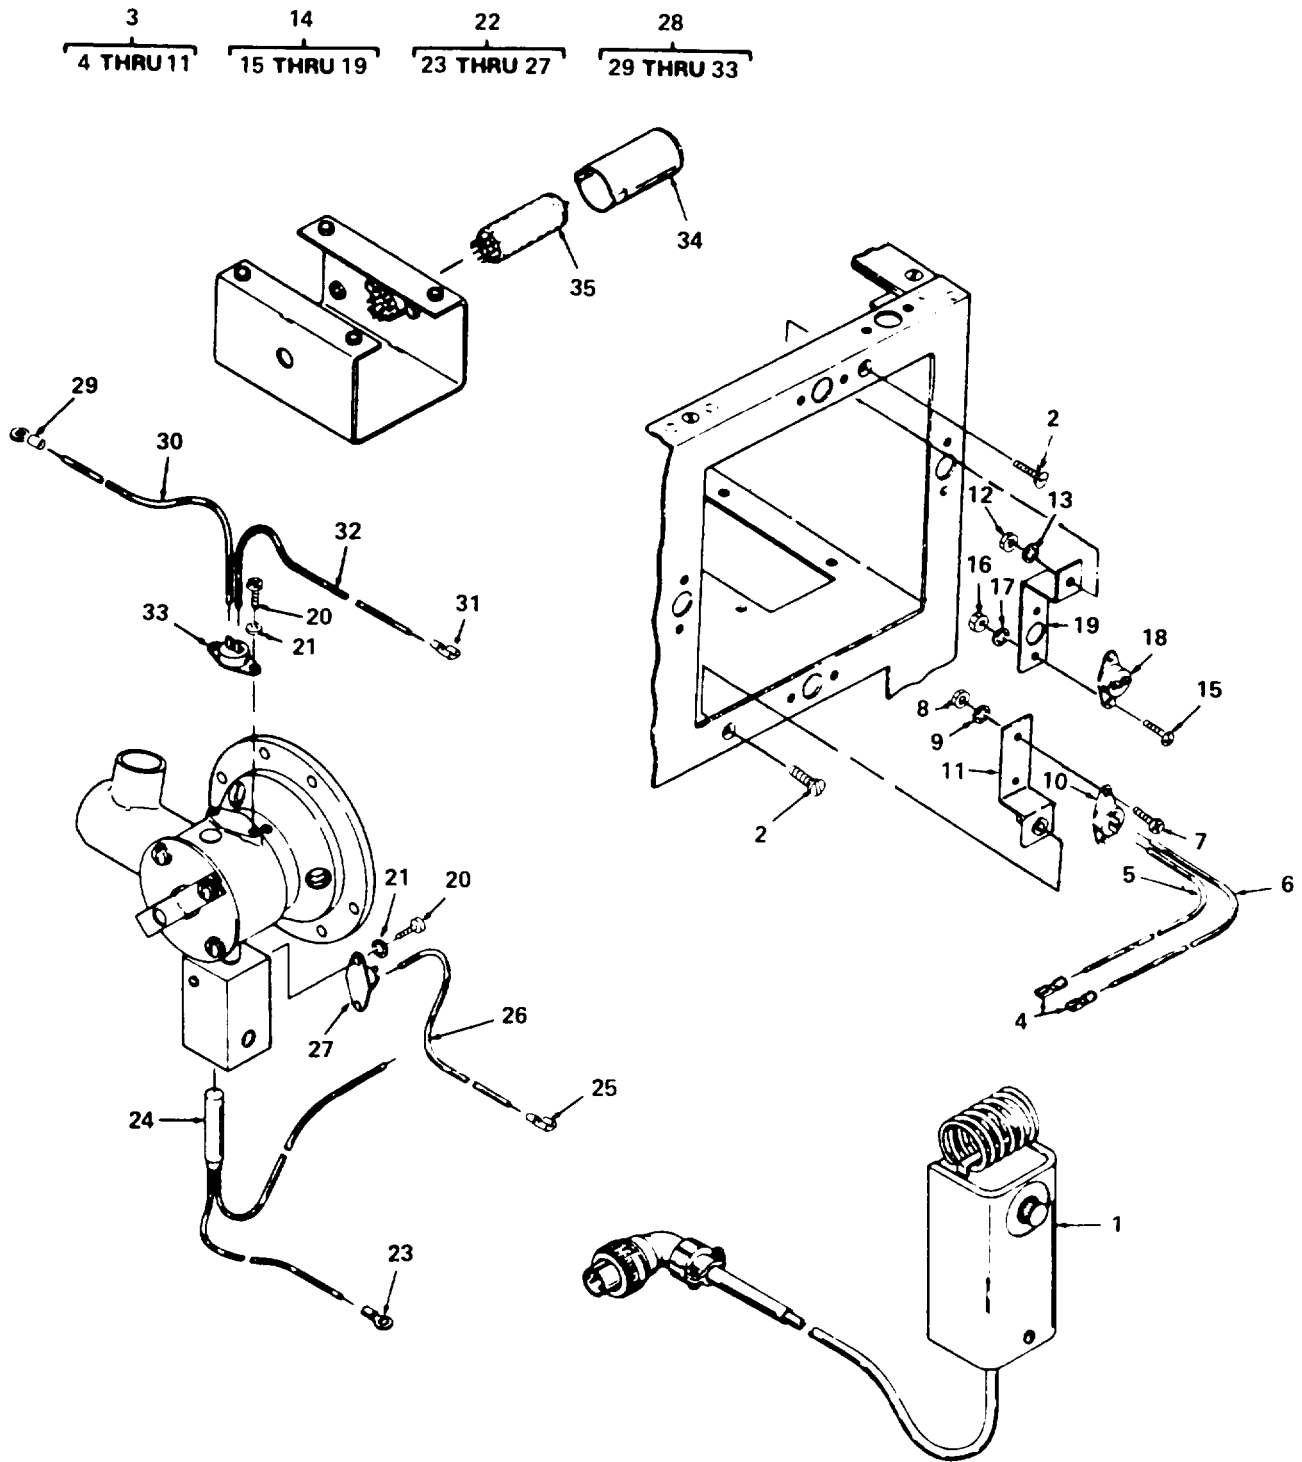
Wiring Terminal Blocks, and Motor Control Resistor.
